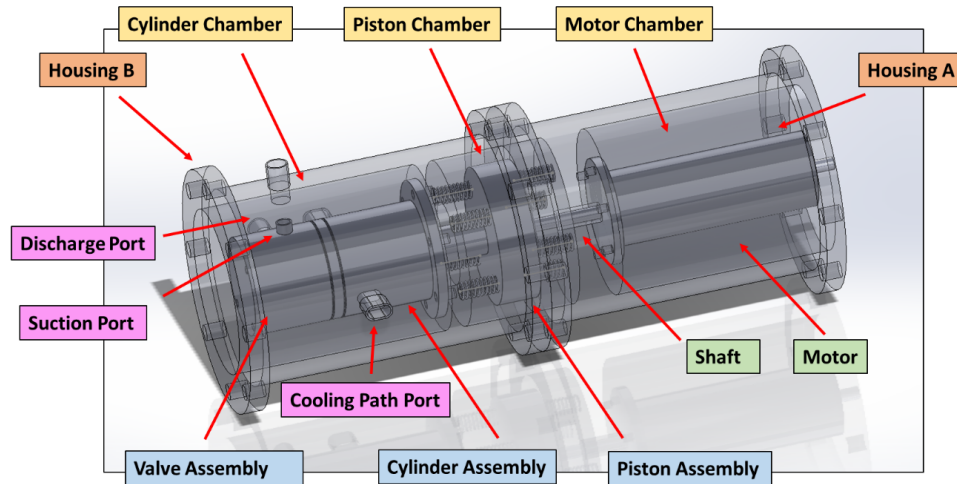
Schematic drawing of the updated linear compressor prototype design.
